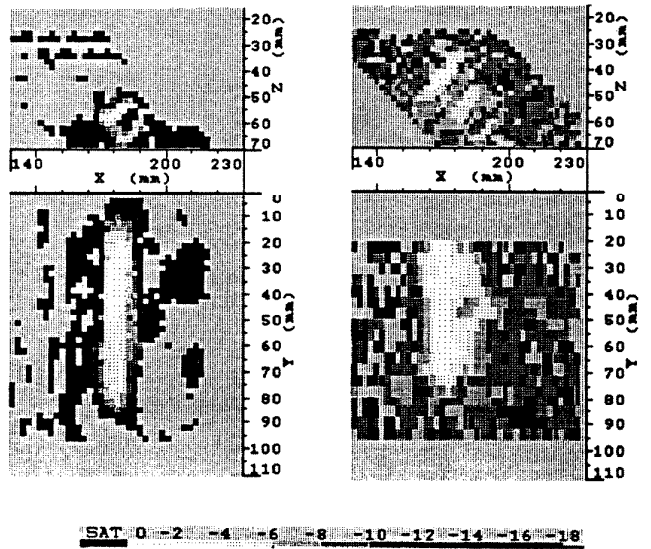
B-scan (up) and C-scan (down) views of a 4 mm diameter SDH in SCSS ; focused beam probe (left) and TRL probe (right)
